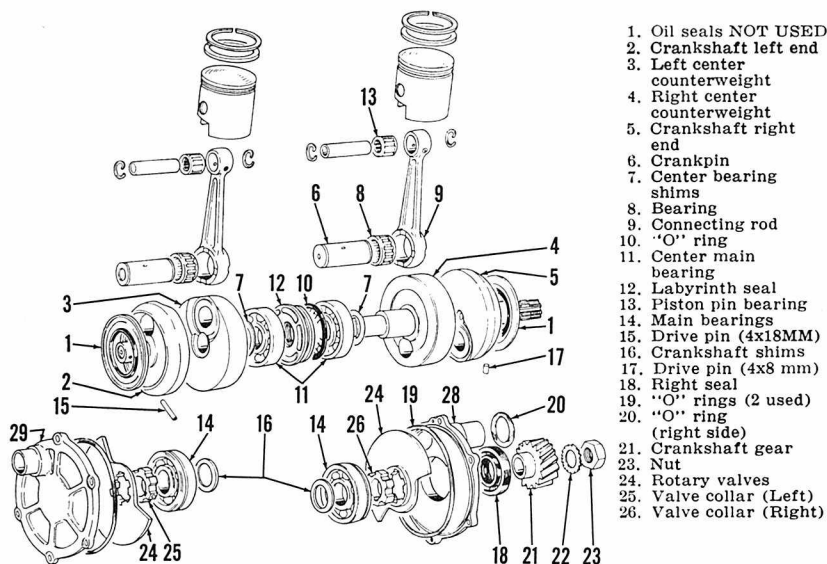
Exploded view of crankshaft assembly and rotary valves. Refer to Fig. BS4-23 for valve timing. Seals (1) should not be installed. Refer to text.
